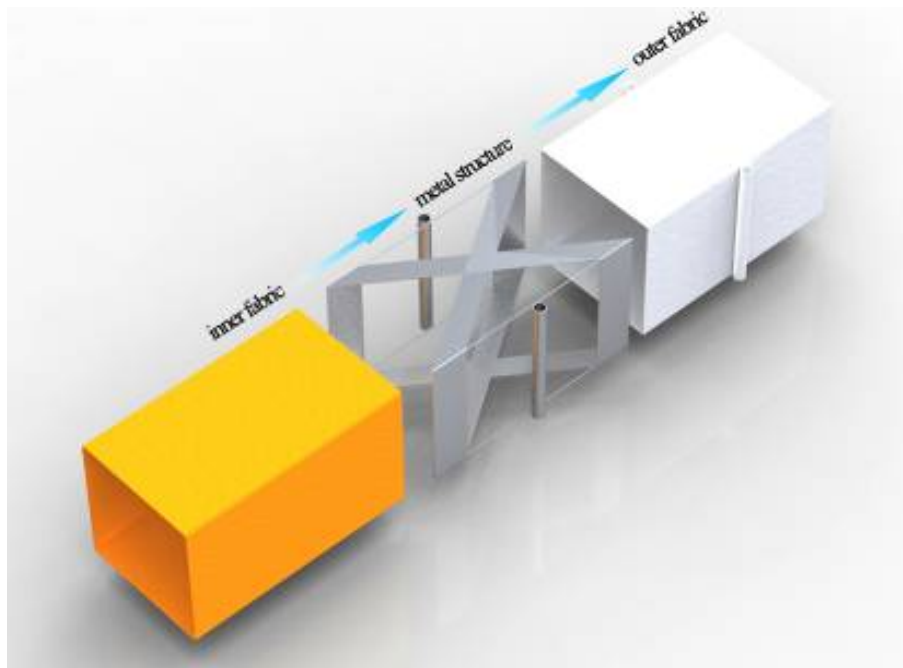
Cube boxes made by fabric with steel structures inside for support
